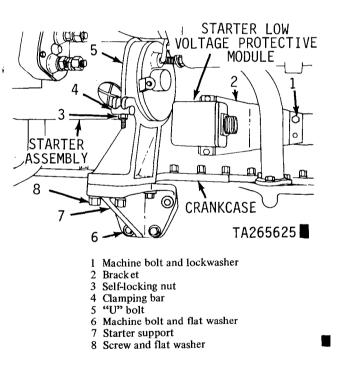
Removing or installing starter low voltage protective module and starter support.
